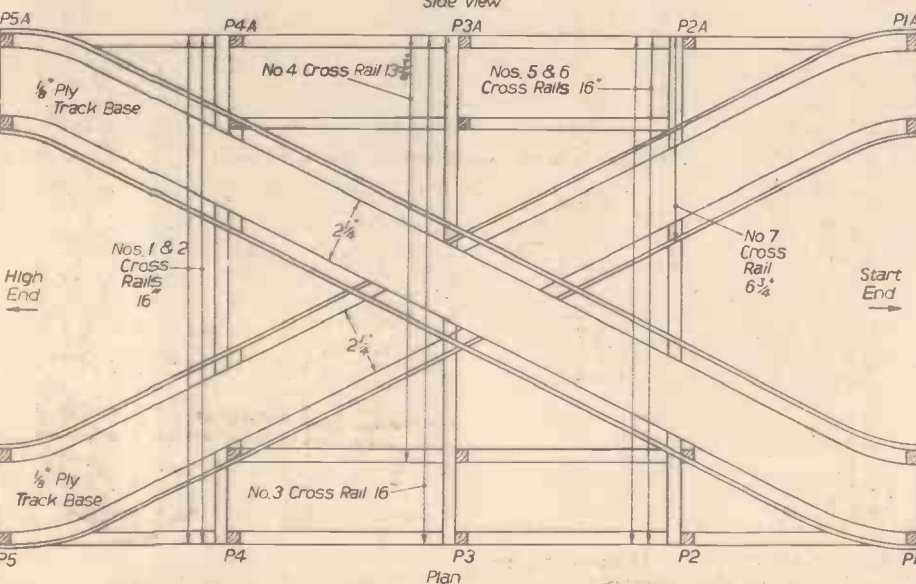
(Left).—Plan of centre cross-over track and framing.
